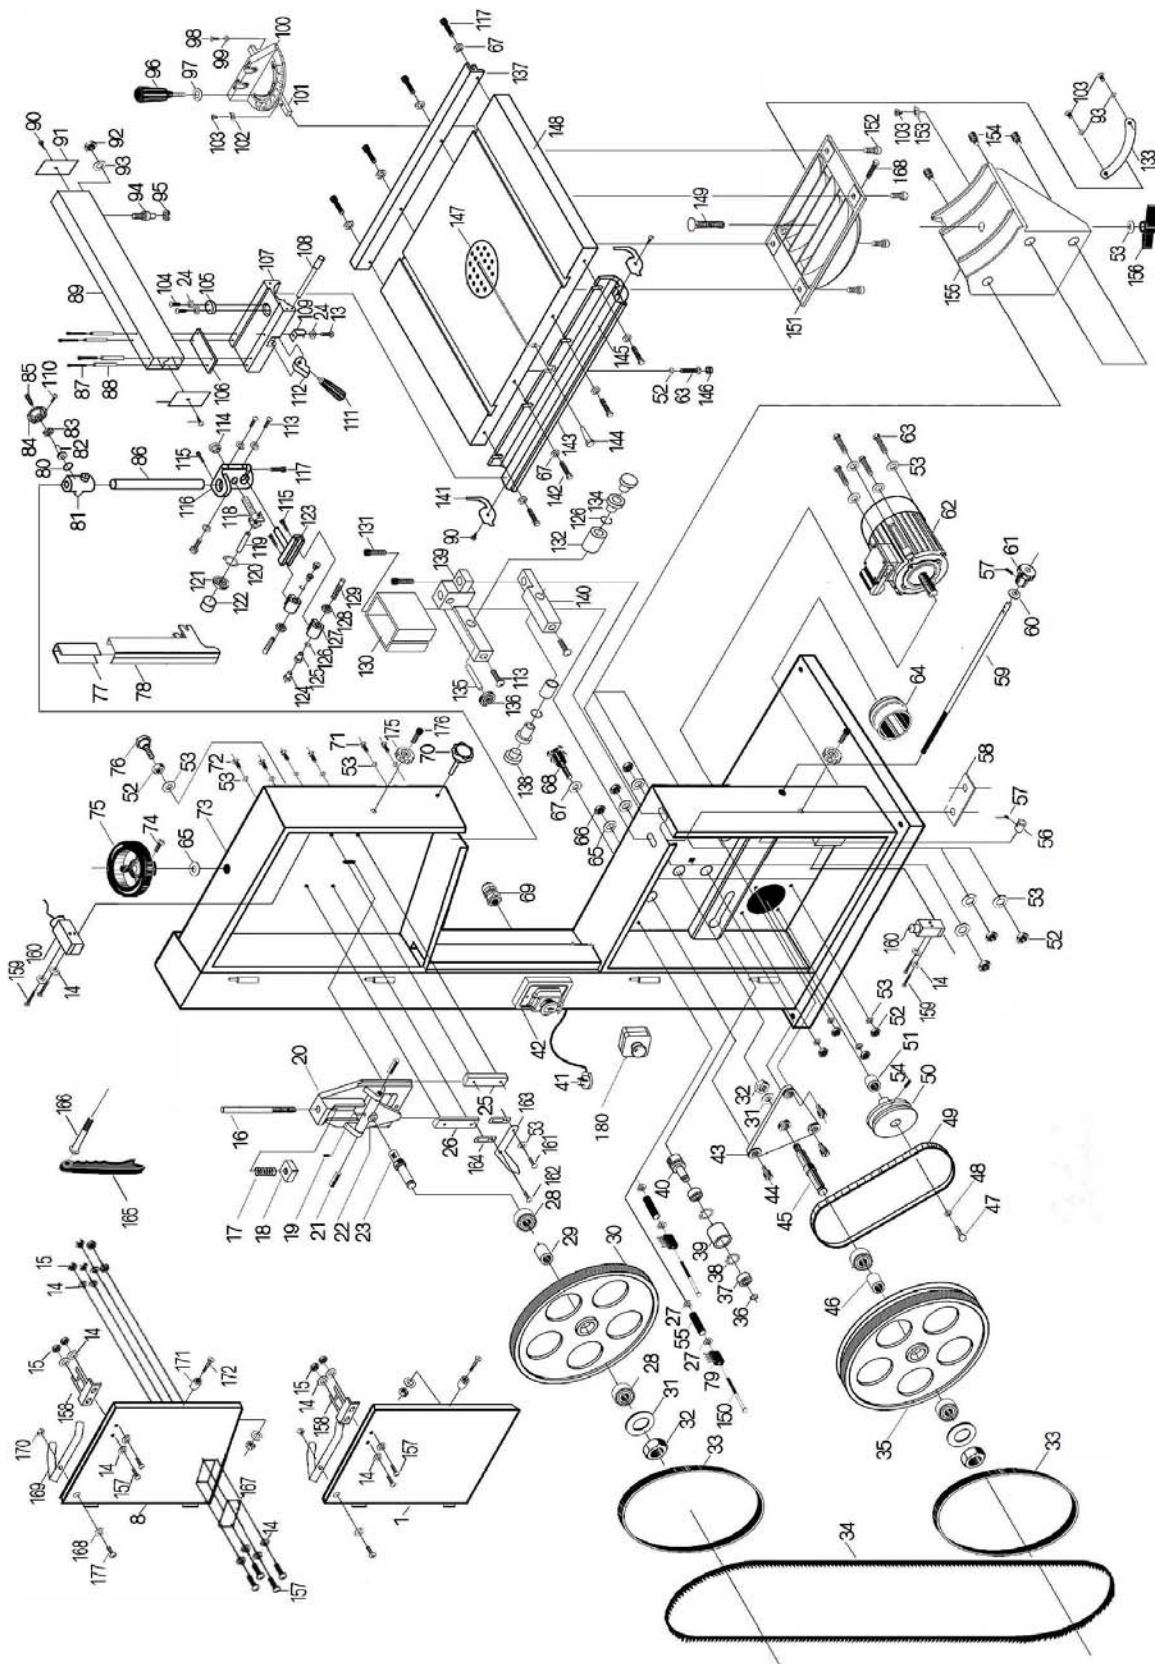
Spare parts drawing - Wood Band Saw HBS 405
